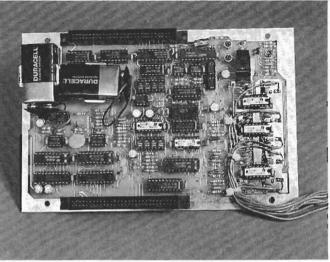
THE FINISHED FRONT-END BOARD. This, too, is an early prototype, so your board won't look exactly like this one. Do not wire the two boards together until you are told to do so.
